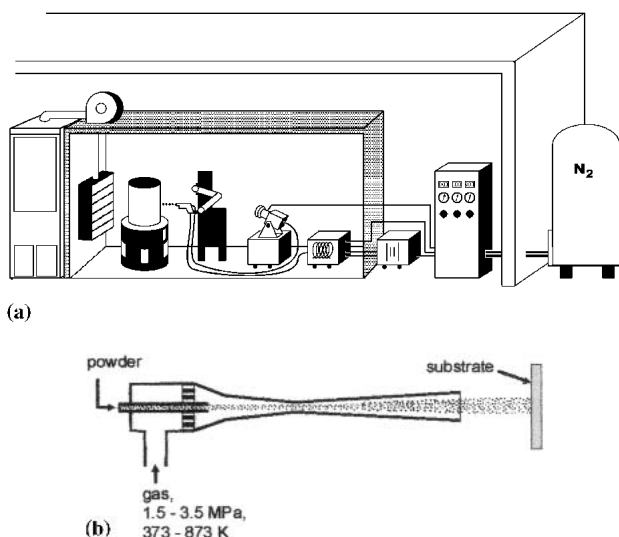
(a) Assembly of a cold spray installation; (b) principle of cold gas spraying
